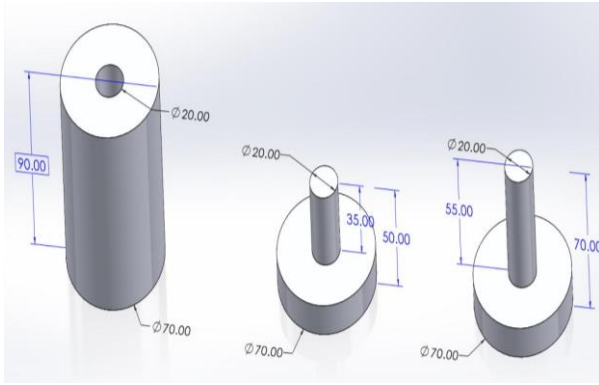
3D drawing of both components: Die and Punch with Dimensions
